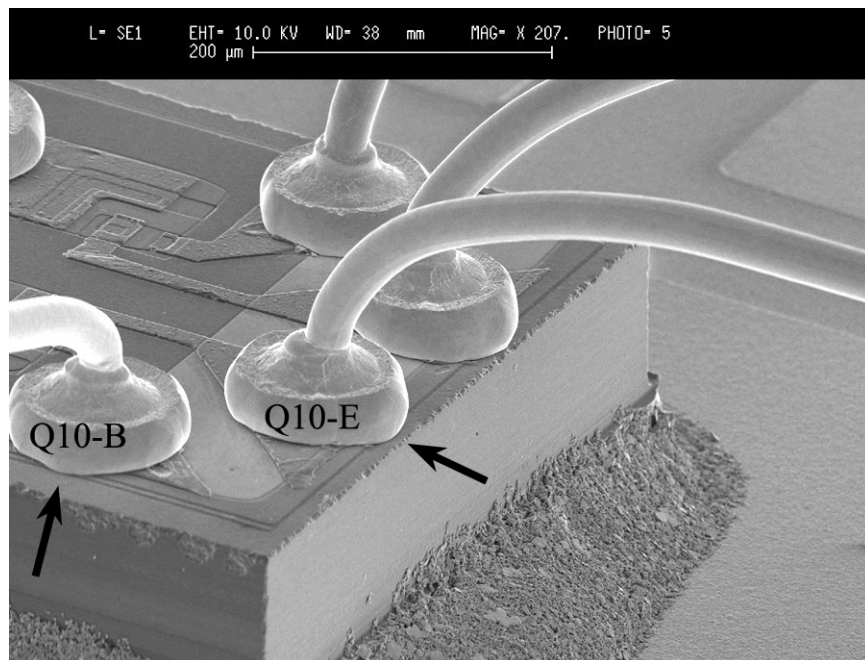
Close-up view shows the relatively large diameter ball bonds touching the unpassivated die edge of the die.
